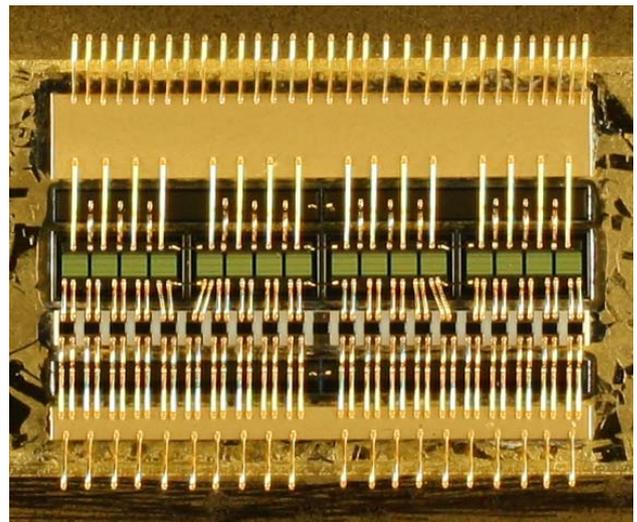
Close-up view of one of the package cavities showing details of the dice and the gate resistors used for the input match.
